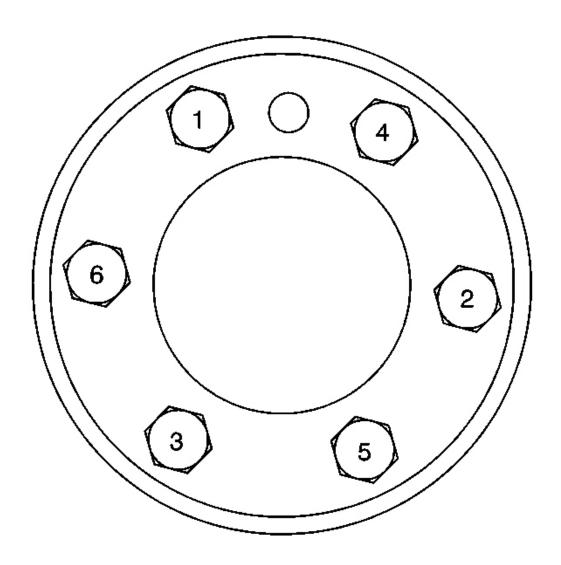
Identifying Flywheel Bolt Tightening Sequence Courtesy of GENERAL MOTORS CORP.
